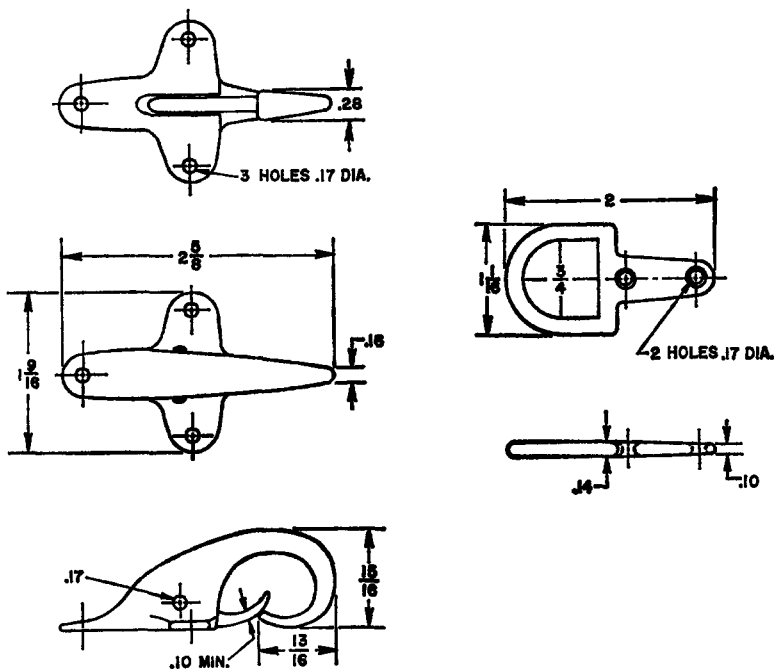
Hook and Dee Ring (inward facing)
